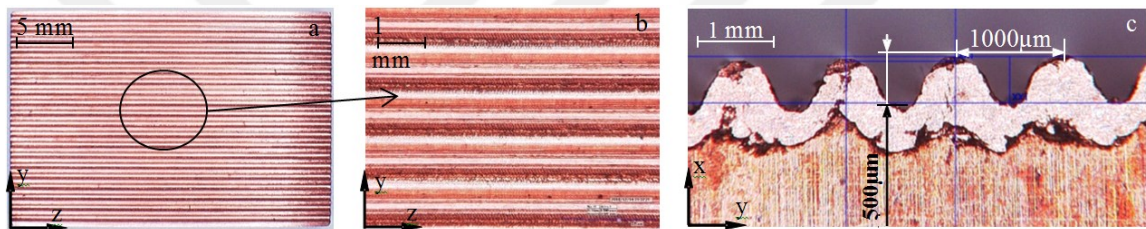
Longitudinal v-grooved surface: a) top view b) 4X view c) cross-sectional view
